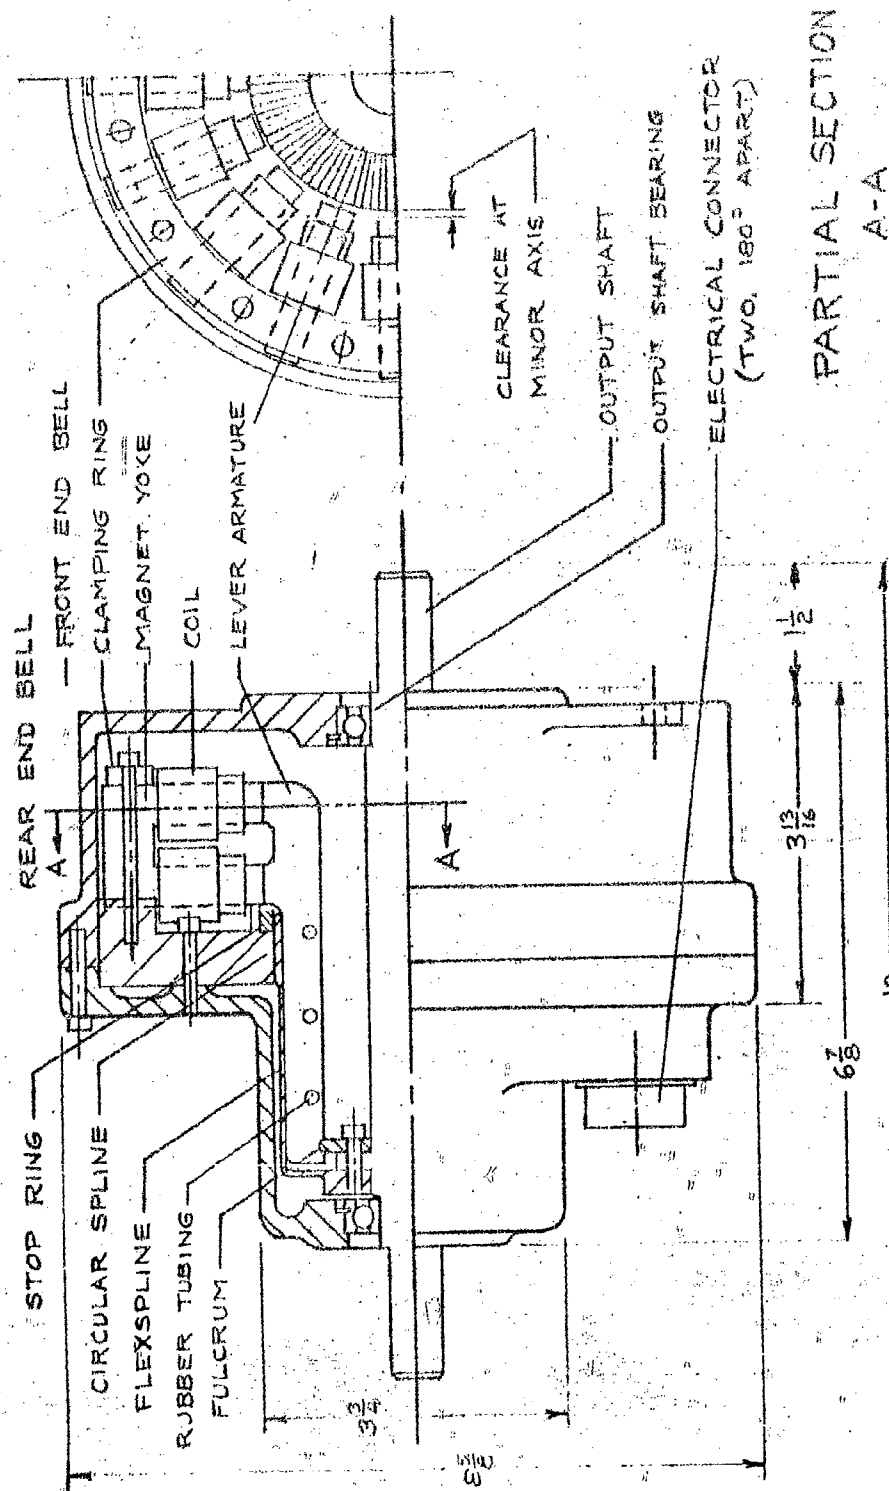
MODEL EHD-3 SECTIONAL DRAWING
